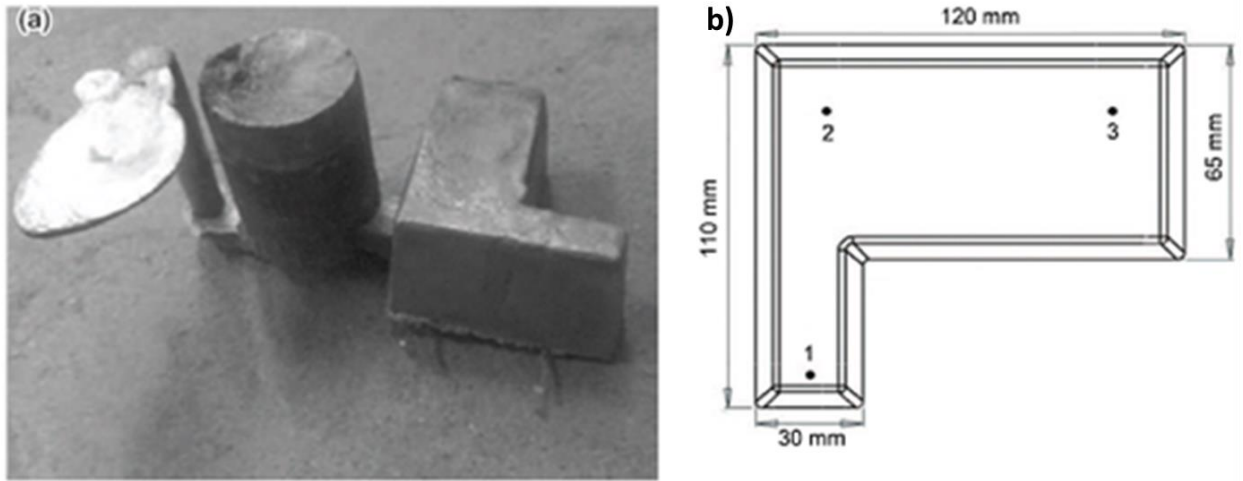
a) L shaped cast part b) Thermocouple locations [16]
